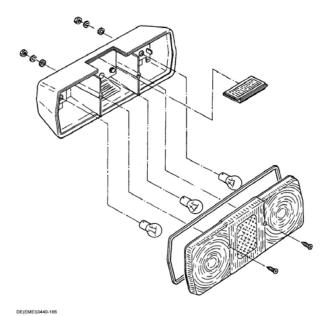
Stop/Tail, Reversing and Indicator Light Exploded View
